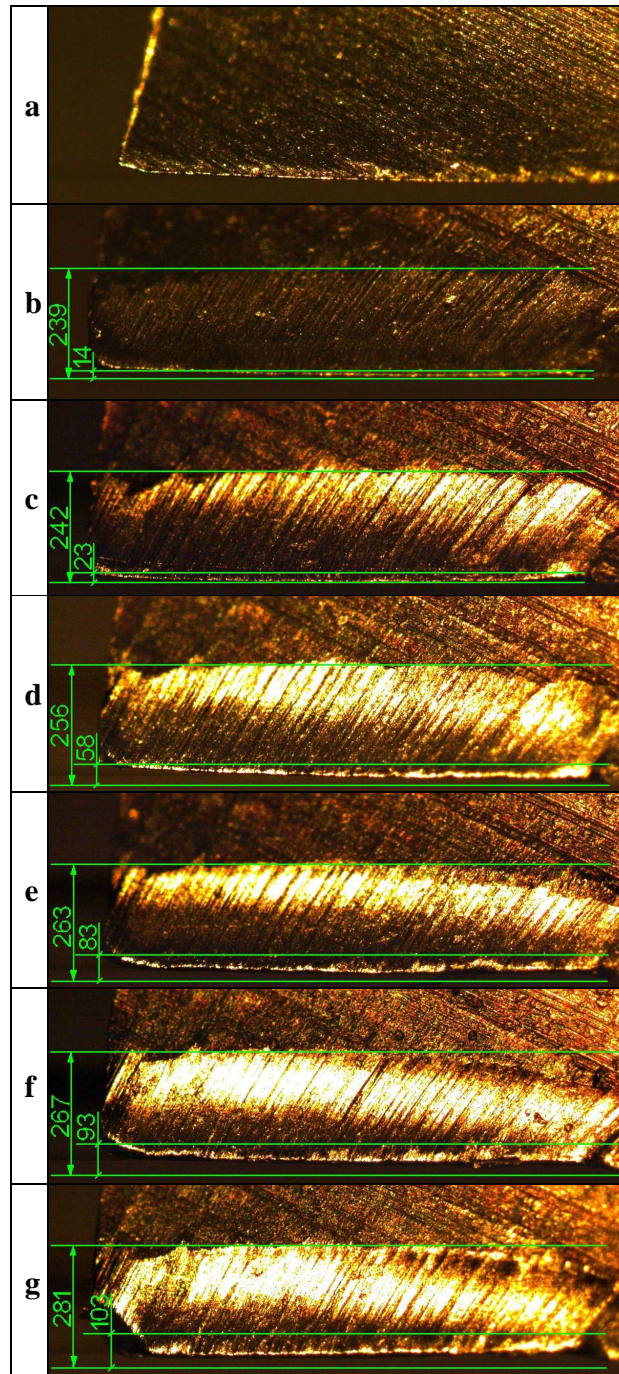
MTE 9mm end mill tooth # 2 linear toolpath rake face wear a) Fresh tool, b-g) After pass 1-6 (each 162 mm length, 9 mm width, 1 mm depth).
